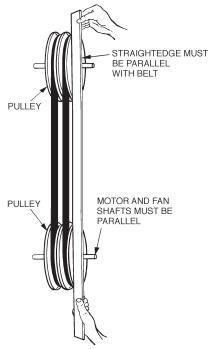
Evaporator-Fan Alignment and Adjustment
